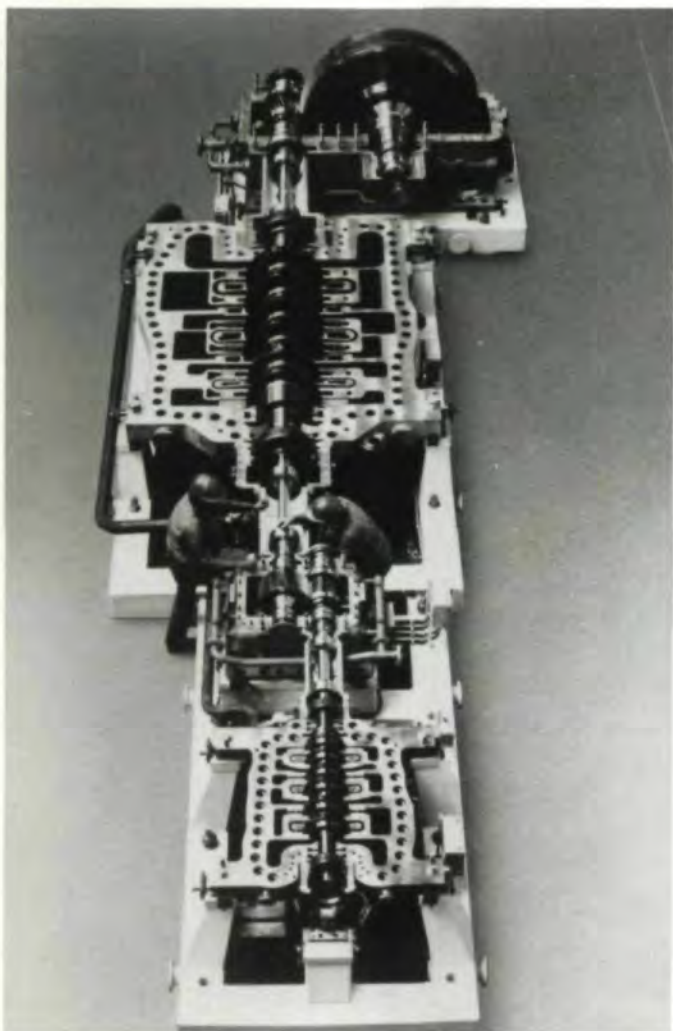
Total view of a high- and low-pressure gas compressor unit equipped with high speed gears, Ref. Nos. 2 and 3.
